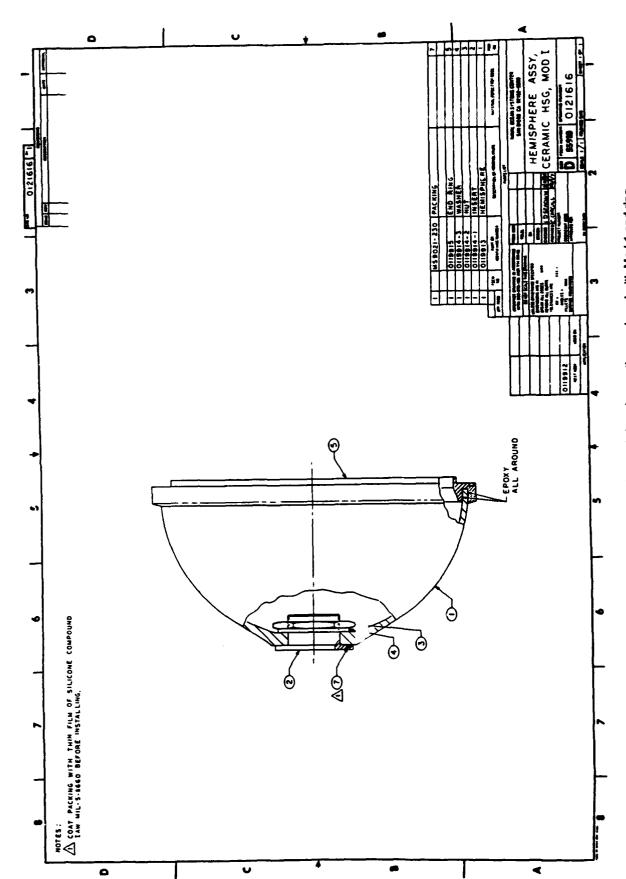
12-inch-diameter hemispherical ceramic housing section equipped with Mod 1 end ring.
